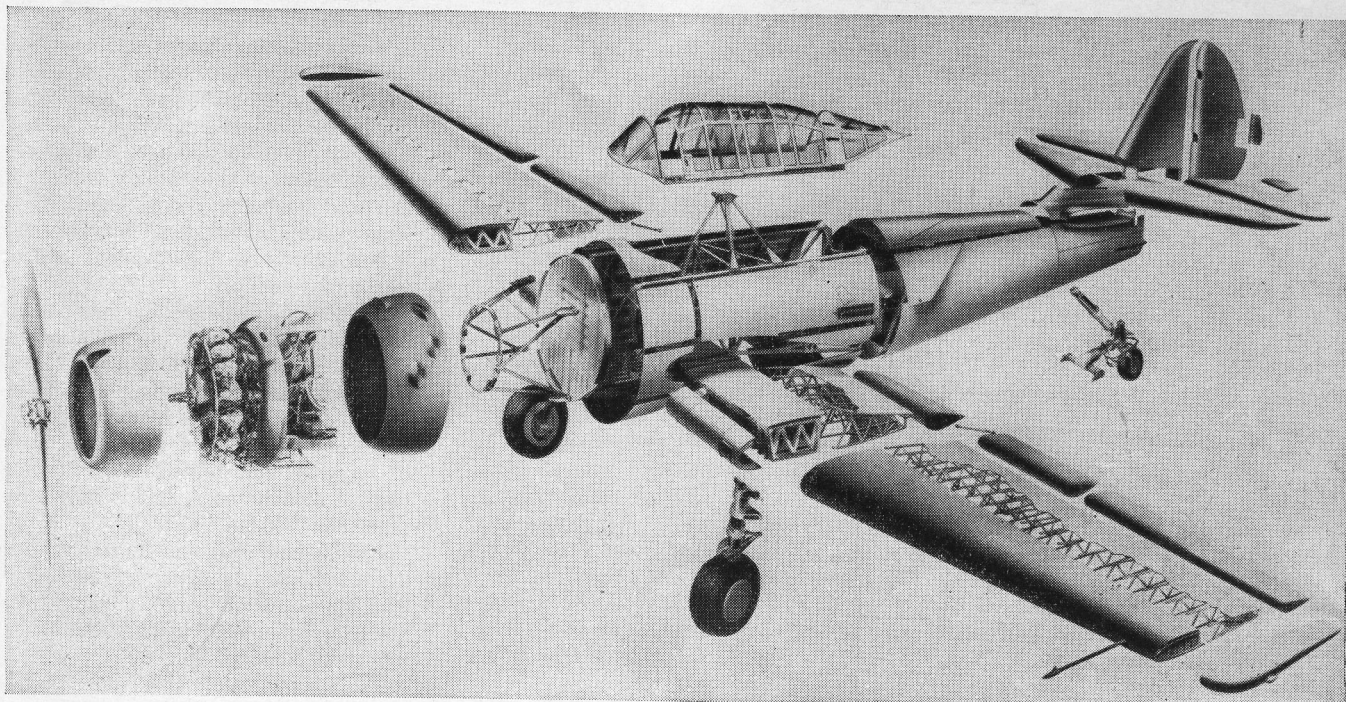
Exploded parts view of Fleetwings BT-12 showing major components.
